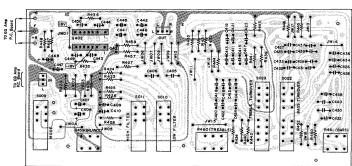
TONE AMP P.C. BOARD (AF-H02)
